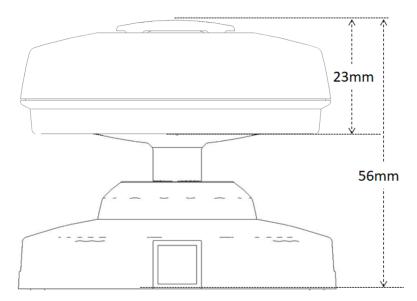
Modbus Gas and TrueVOC Sensor Dimension - Side View - Swivel Mount
